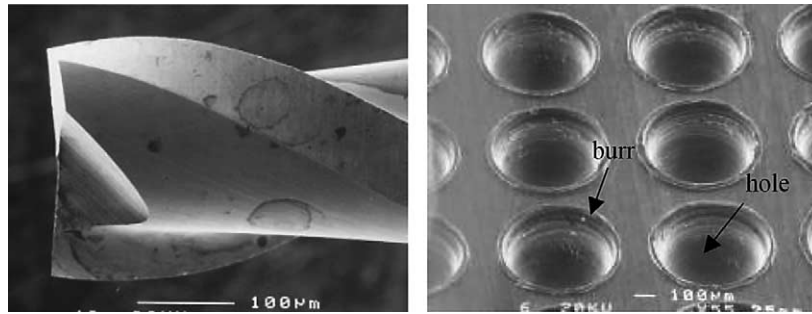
Micro-mill ($\text{\O} 254 \mu\text{m}$) and CMP pad mold fabricated by end-milling.
